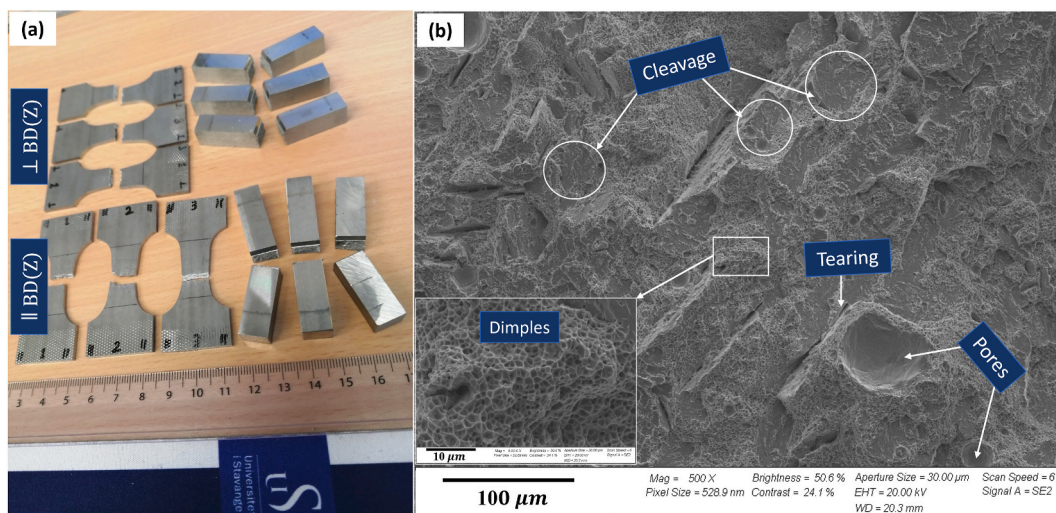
(a) The ruptured mechanical test samples. (b) Fracture surface of the Charpy specimen.
